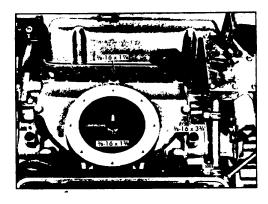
Location of Air Shut-Down Housing Mounting Bolts (6VEngines)
